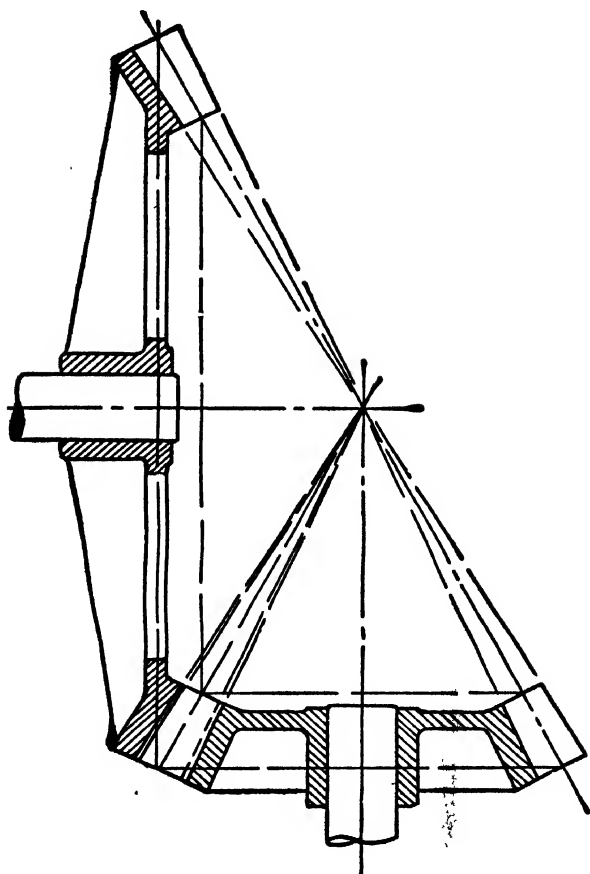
Two to One Bevel Gear and Pinion in Section.
